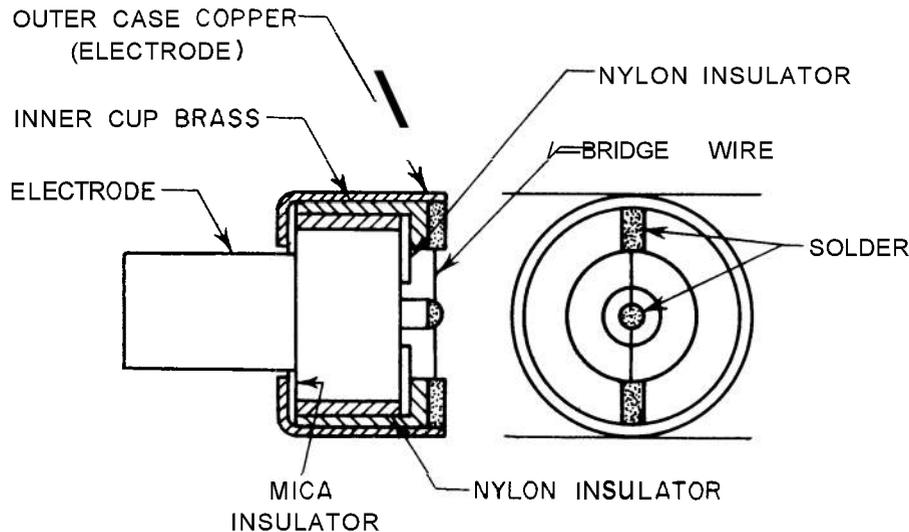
Drawing Showing Construction of Coaxial EED, Mark 7 Mod 0
